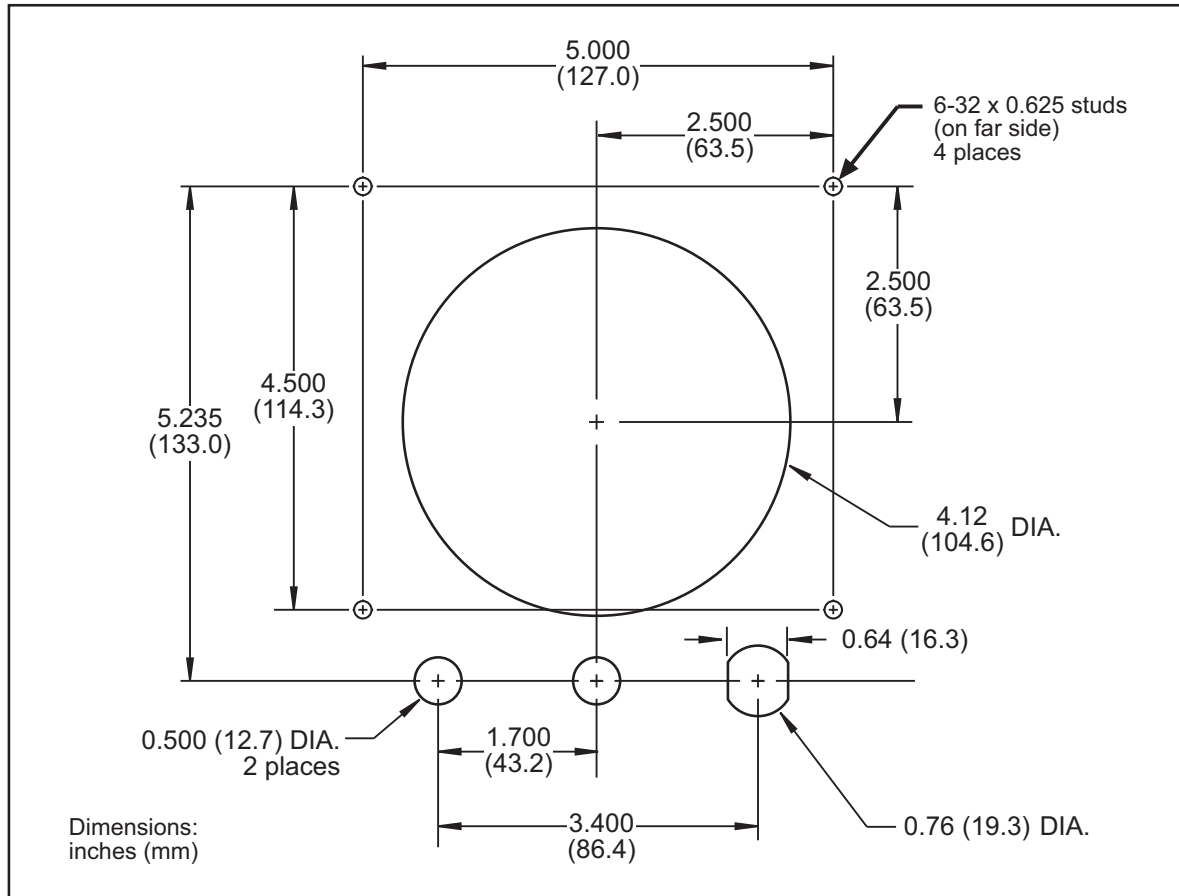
WPC 1000 Display Board Kit: Mounting and Cutout Dimensions
